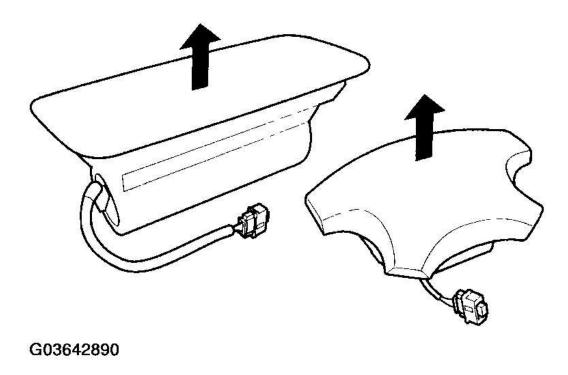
Storing Removed Airbag With Pad Surface Up Courtesy of AMERICAN HONDA MOTOR CO., INC.
